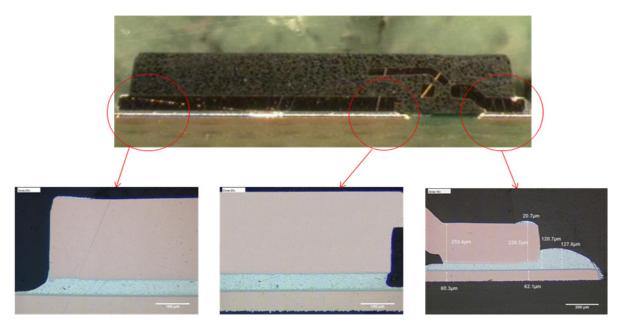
Cross Sections of Board Mount. Solder Thickness Variation across Package
